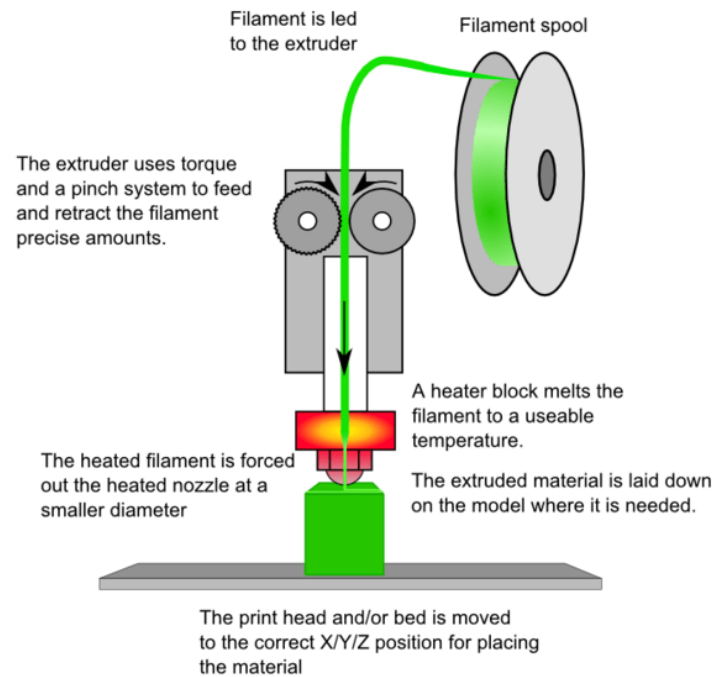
Fused Deposition Modelling printing scheme [6]
